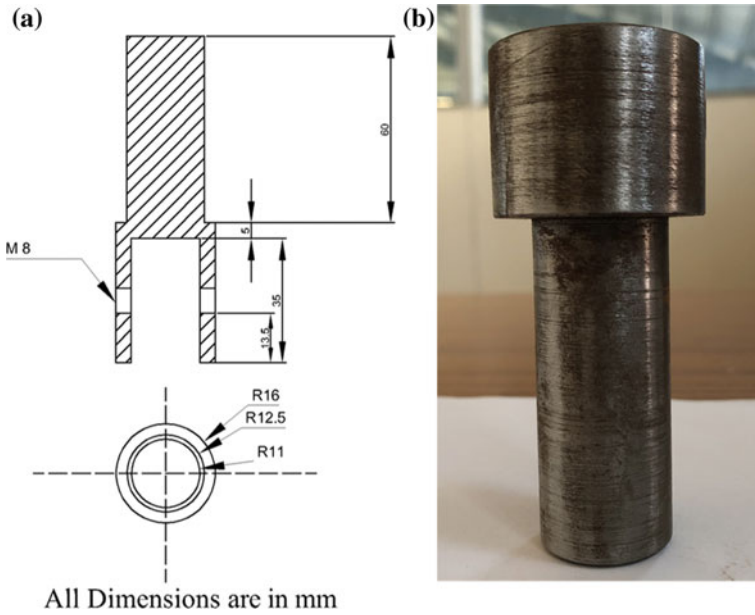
a Illustration of the FSW tool holder, b photograph of the tool holder
